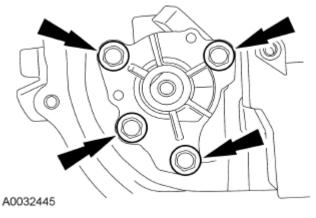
Locating Oil Pump Assembly Bolts Courtesy of FORD MOTOR CO.
